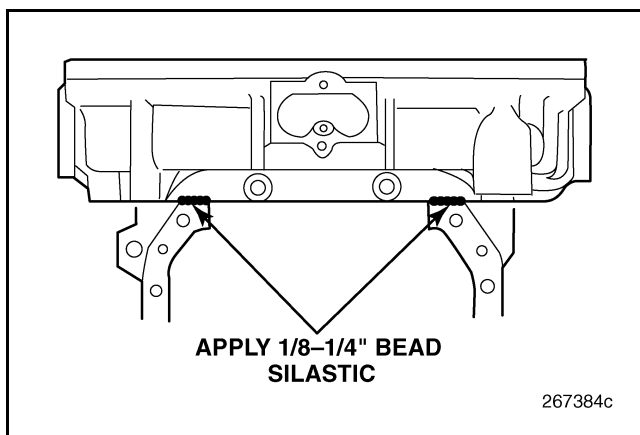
Apply RTV Sealant to Joint Between Flywheel Housing and Cylinder Block
